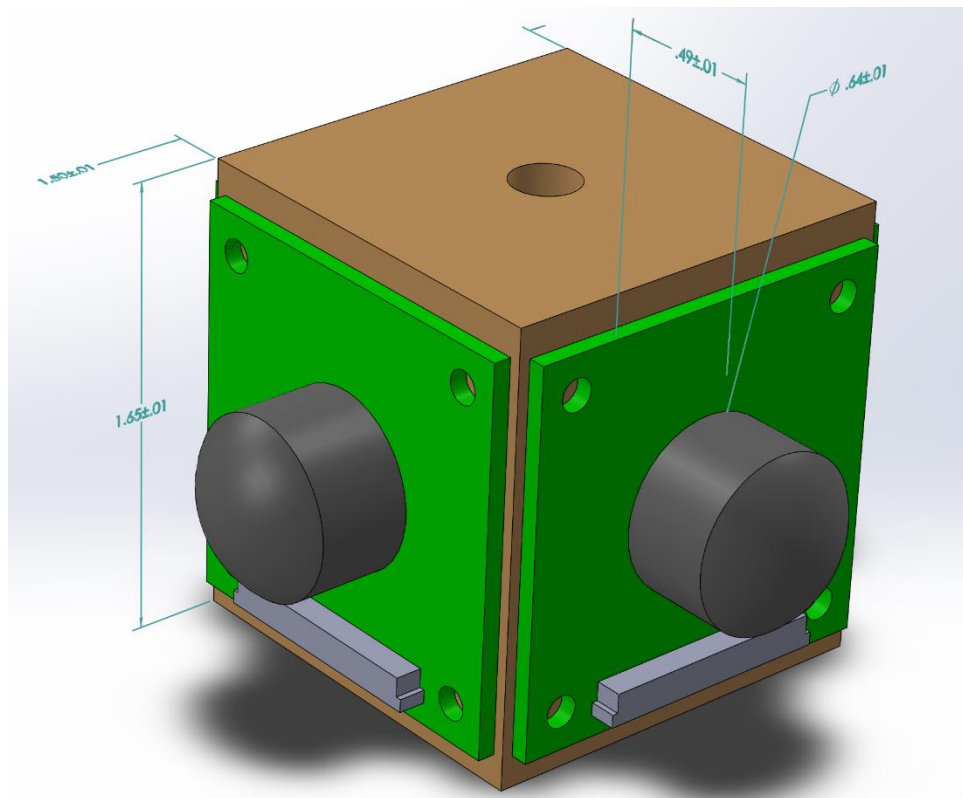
POS Camera Module and Mounting Fixture Dimensions
